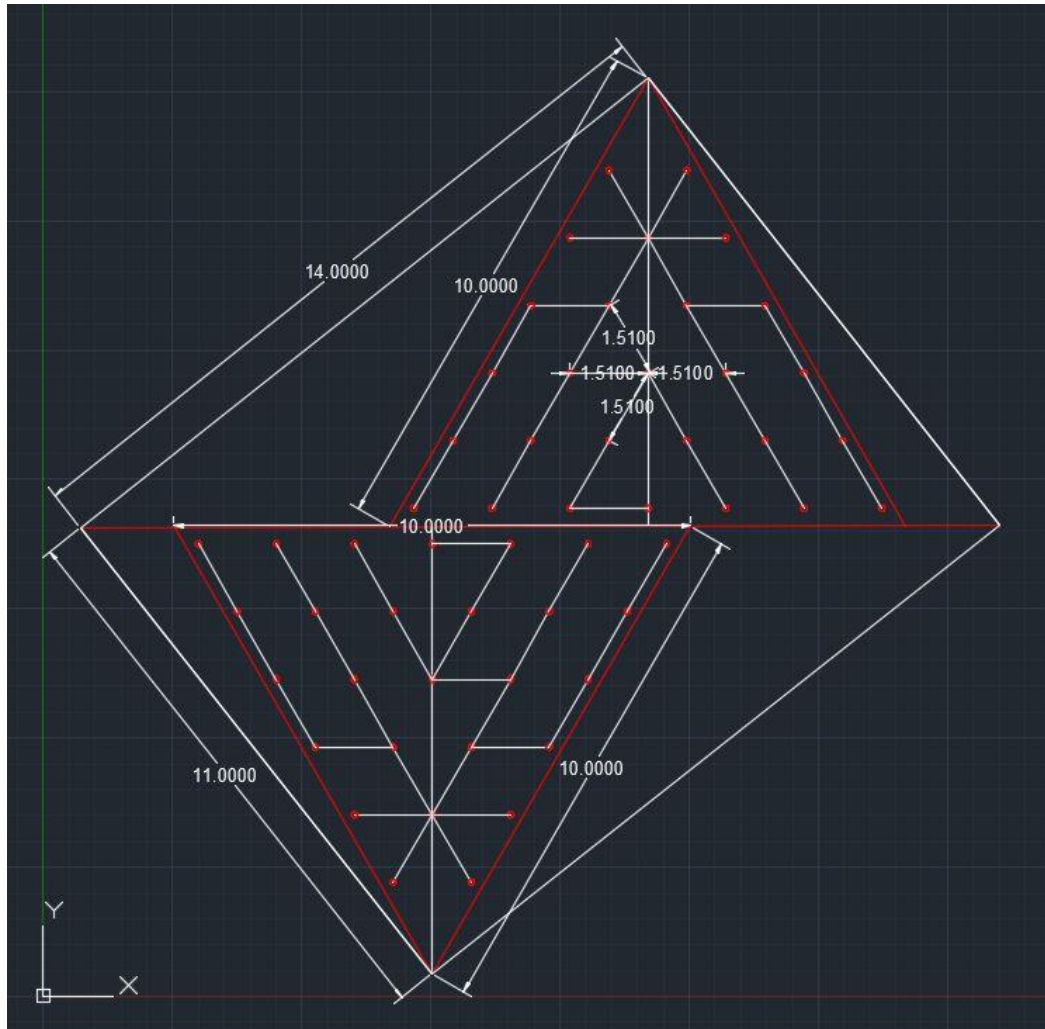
Peg Board AutoCAD Drawing for Laser Cutter.
